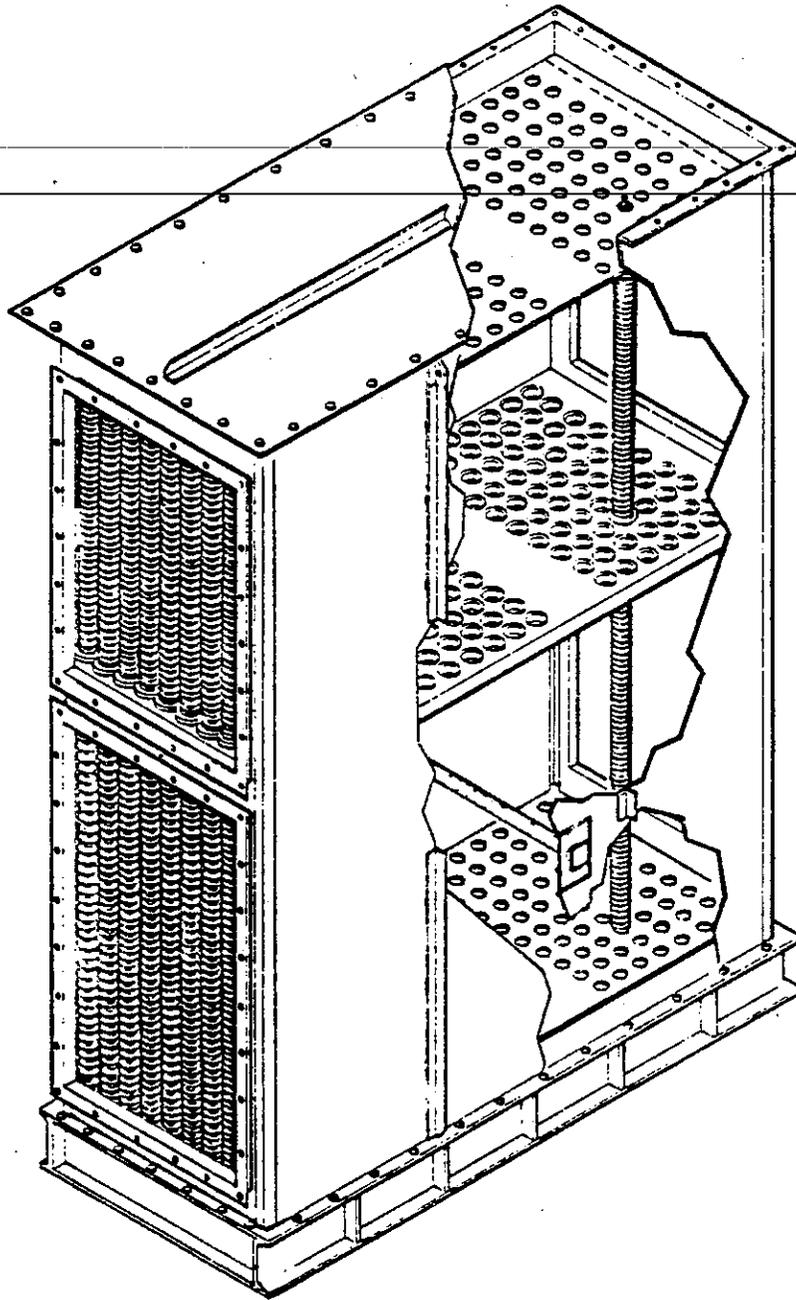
Typical heat pipe heat exchanger construction.
